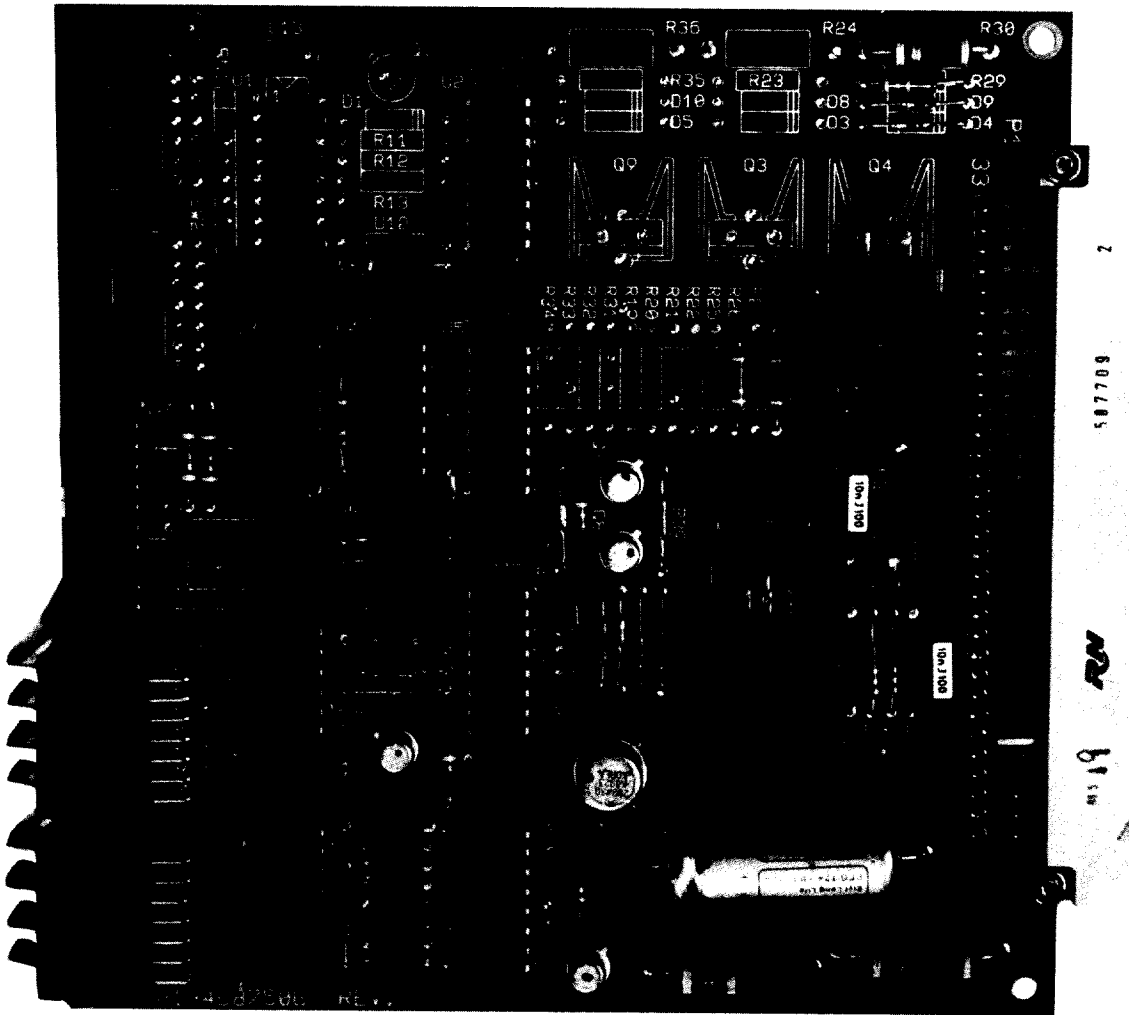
(8043826) View of a Typical Timer P/C Board Assembly
